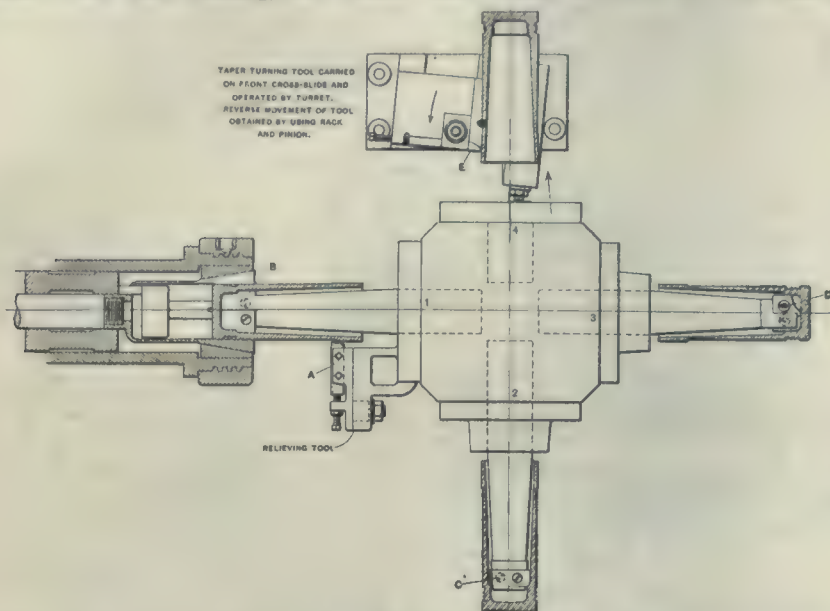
TOOL LAYOUT, SECOND SETTING FOR MACHINING SHRAPNEL SHELL FORGINGS.
